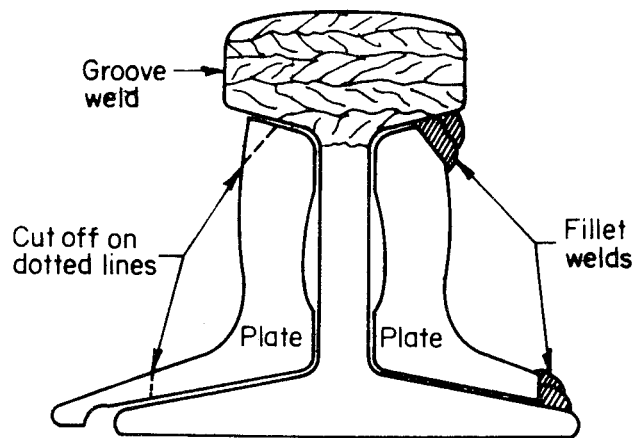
CROSS SECTION OF RAIL JOINT WITH WELDED JOINT BARS (150)
